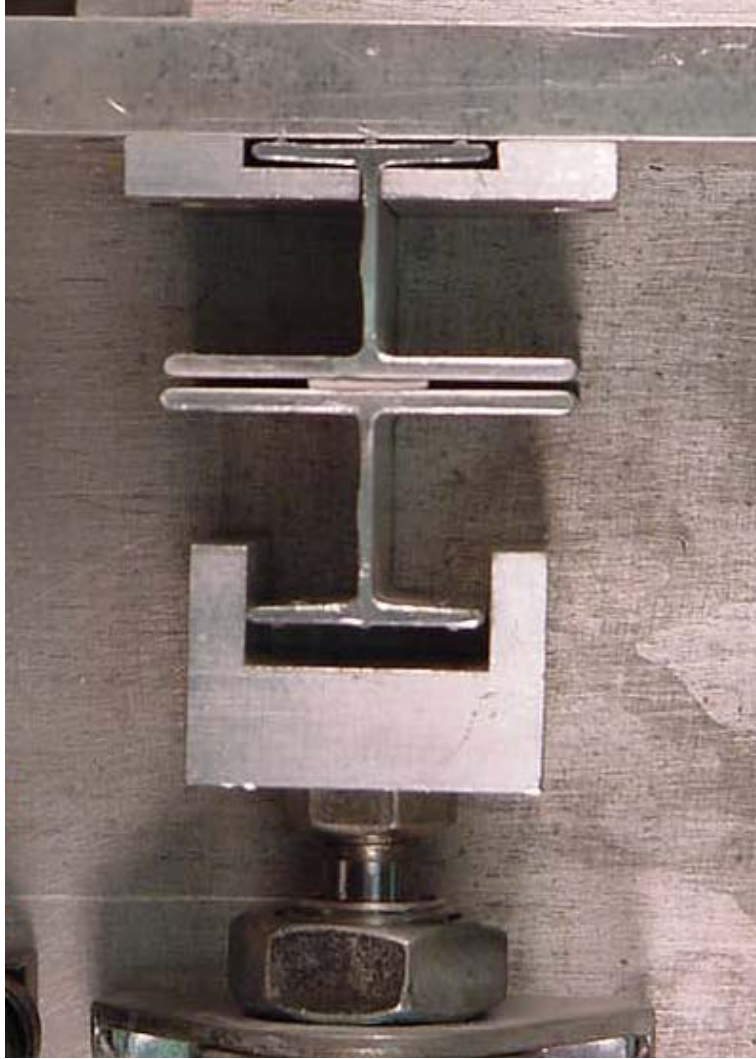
Specimen in preloading fixture. (Specimen removed from alignment jig and placed in preload fixture.)
